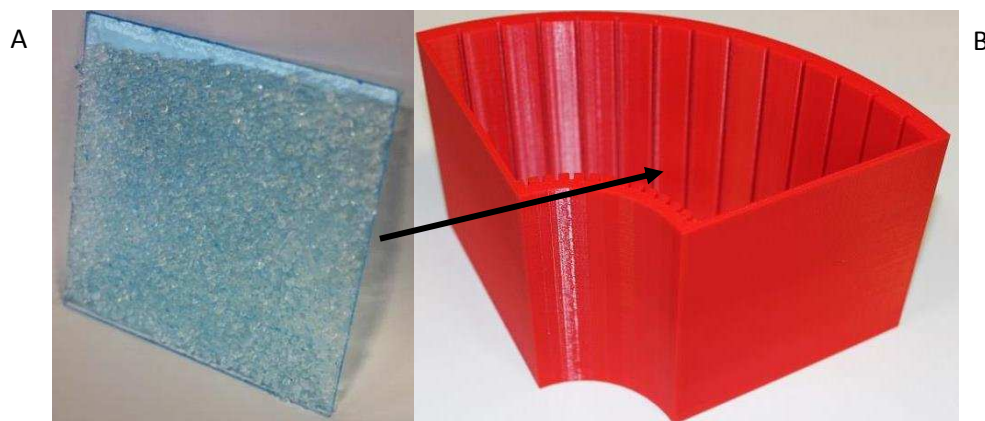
(a) Silica gel granules applied to Perspex sheets for insertion into wheel (b) Section of 3D printed desiccant rotary wheel with grooves for silica gel plates
